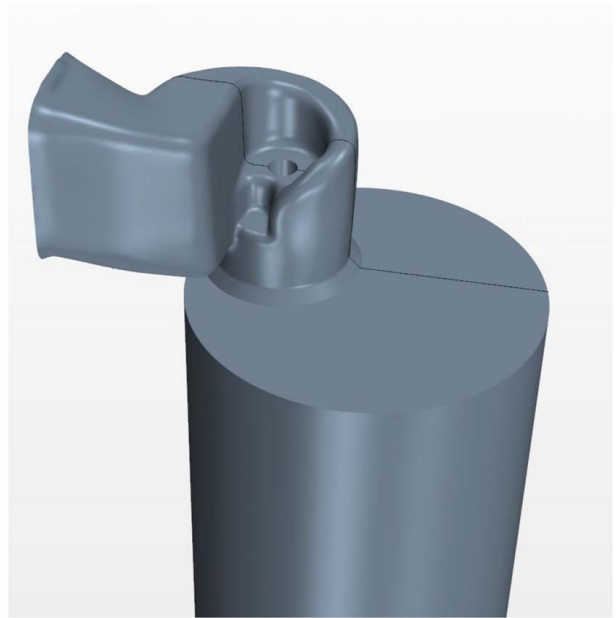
CAD geometry, poppet valve cylinder head in intake configuration
